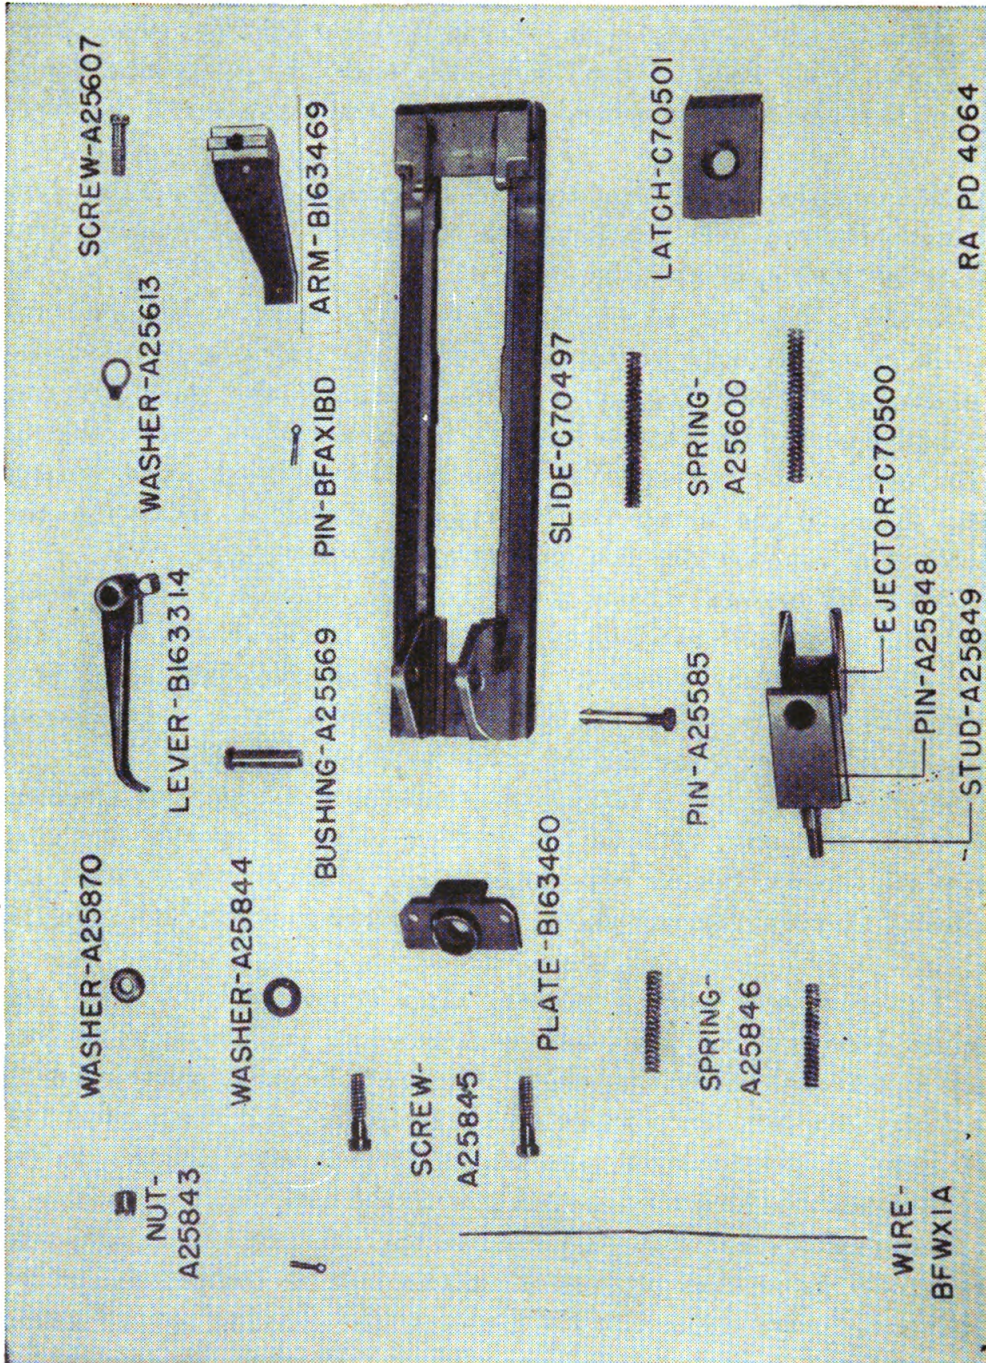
20-mm automatic gun M2, magazine and slide locking group parts.
